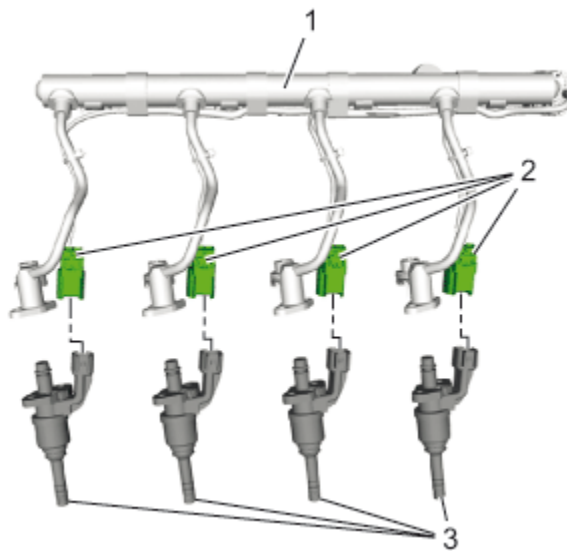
Fuel Injection Fuel Rail, Fuel Injector And Wiring Harness
